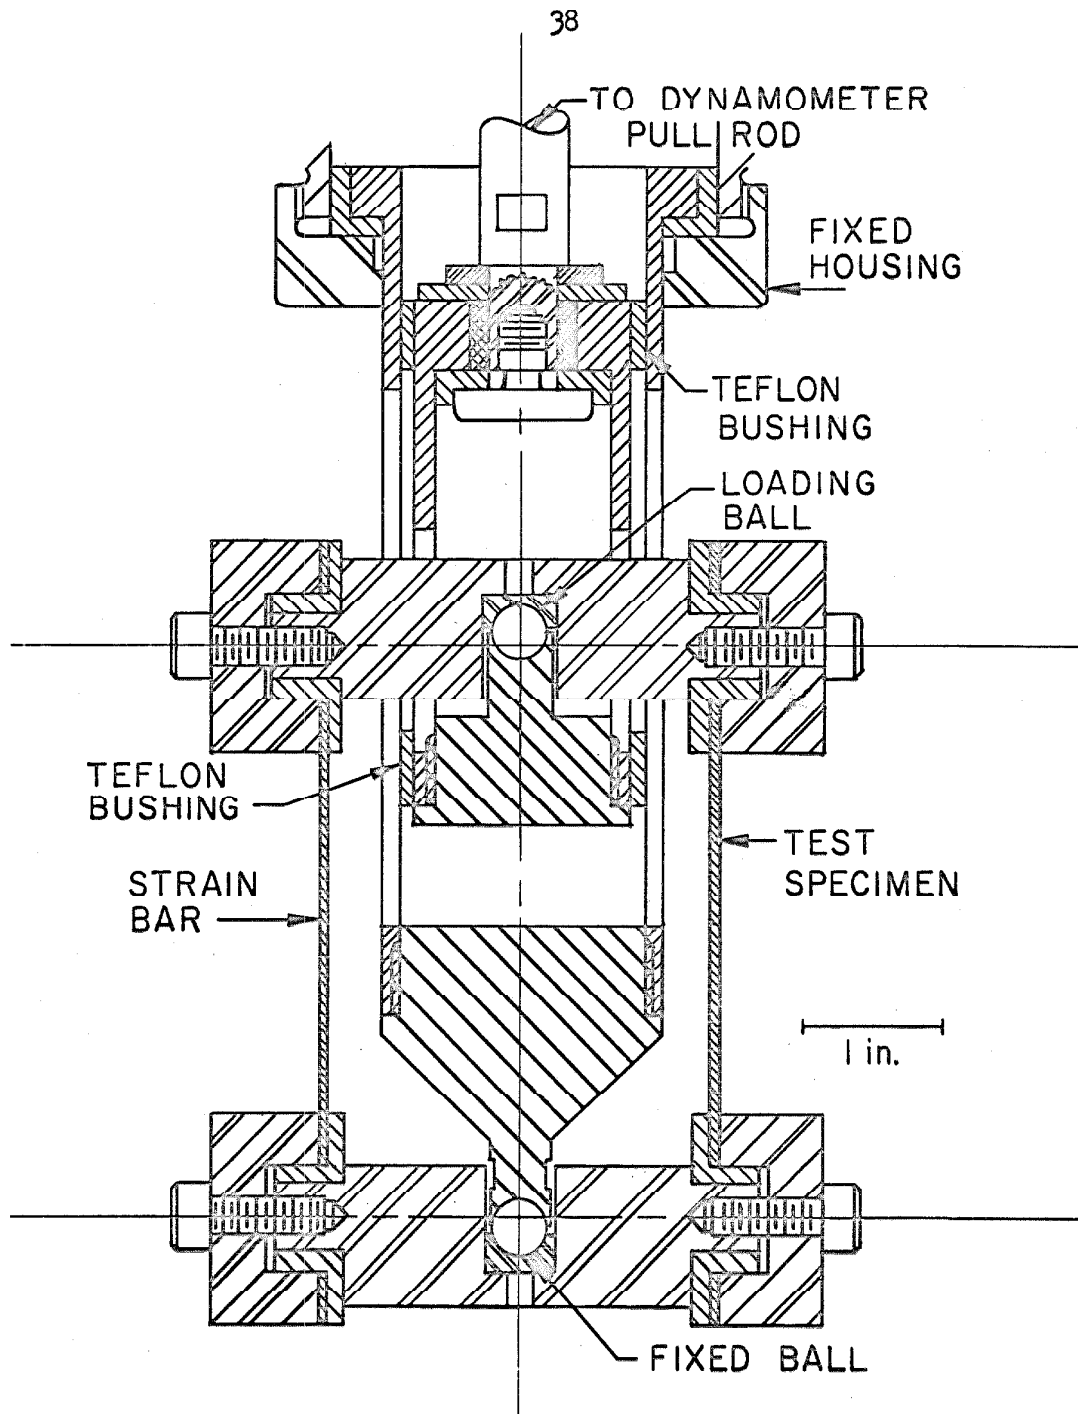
Cross-section drawing of loading fixture for static and dynamic tests.
